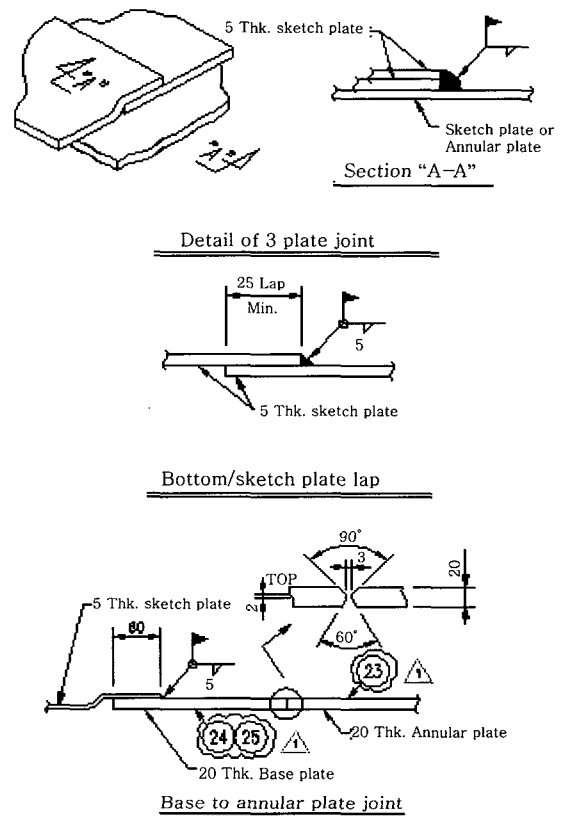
Shape of weld joint for bottom¹⁷⁾
